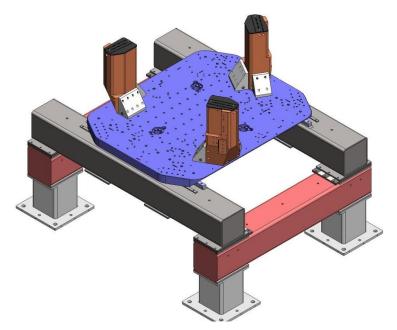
Stage 0 Assembly mounted to the Test Stand.
